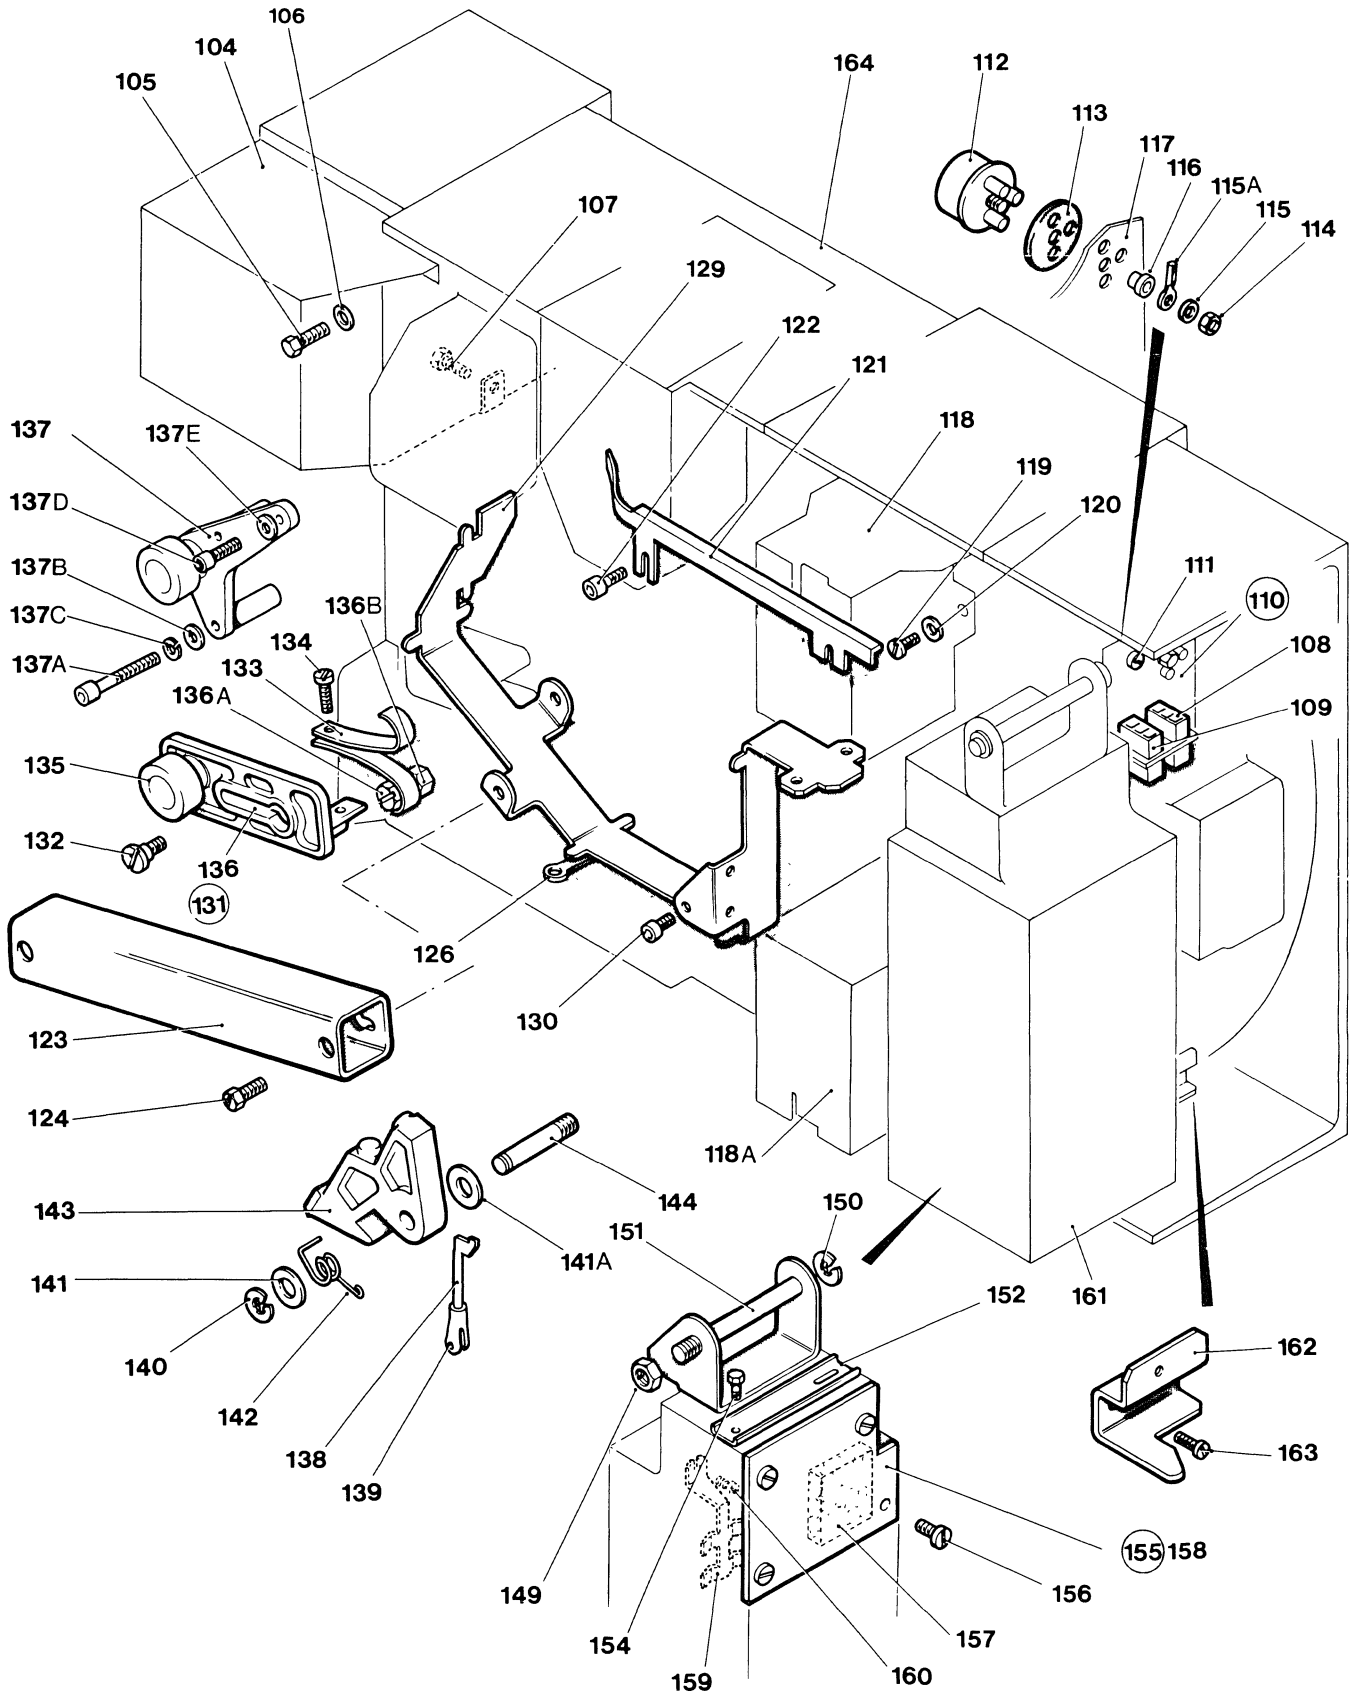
5444 DISK FILE, FINAL ASSEMBLY (PART 3 OF 4)
